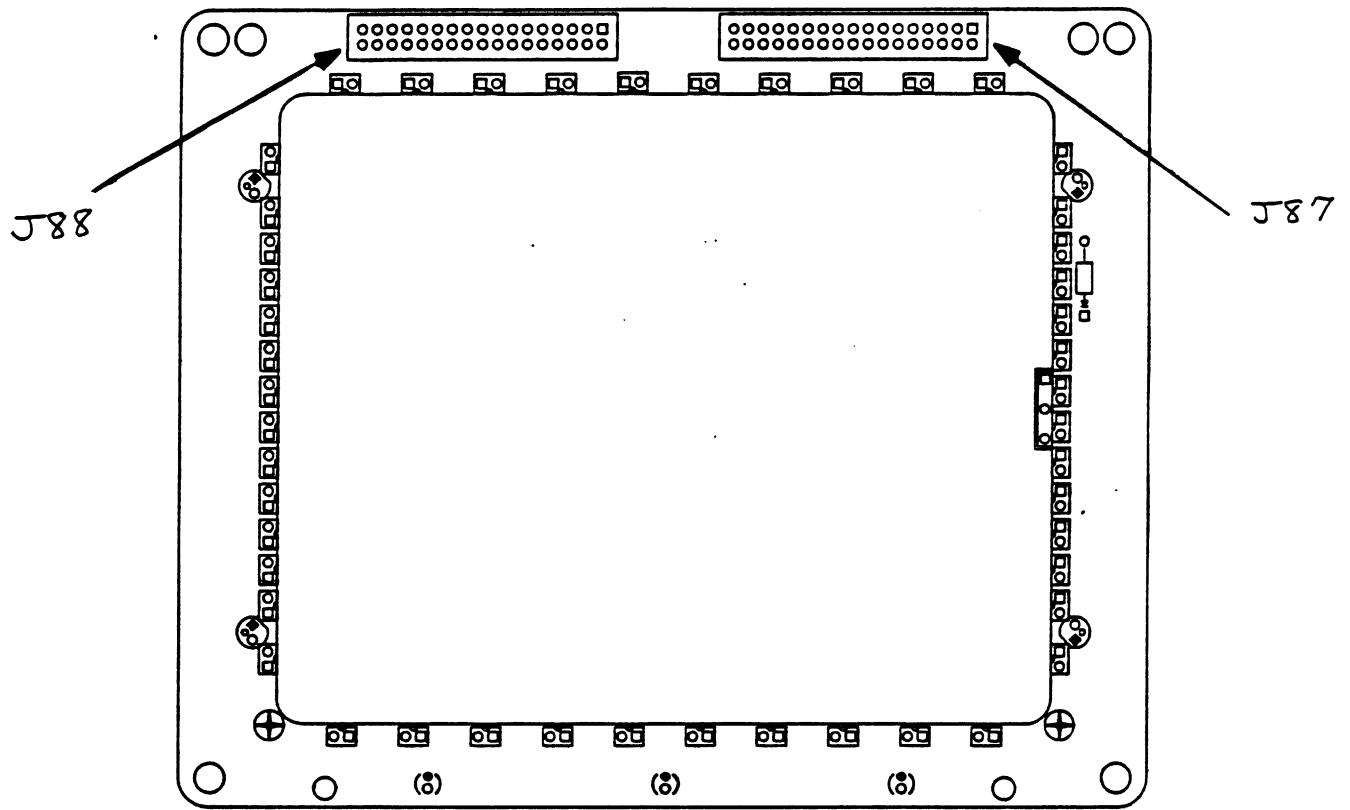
Connector locations for the removal of the A7 Touch Panel Board (inside view).
